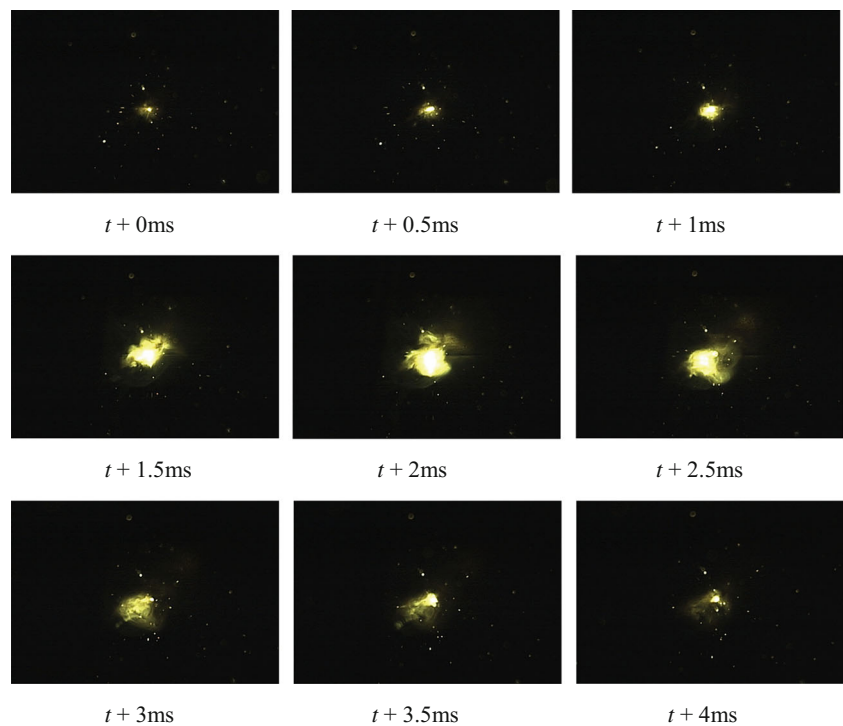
Sequence images of bottom view during high-power laser welding
